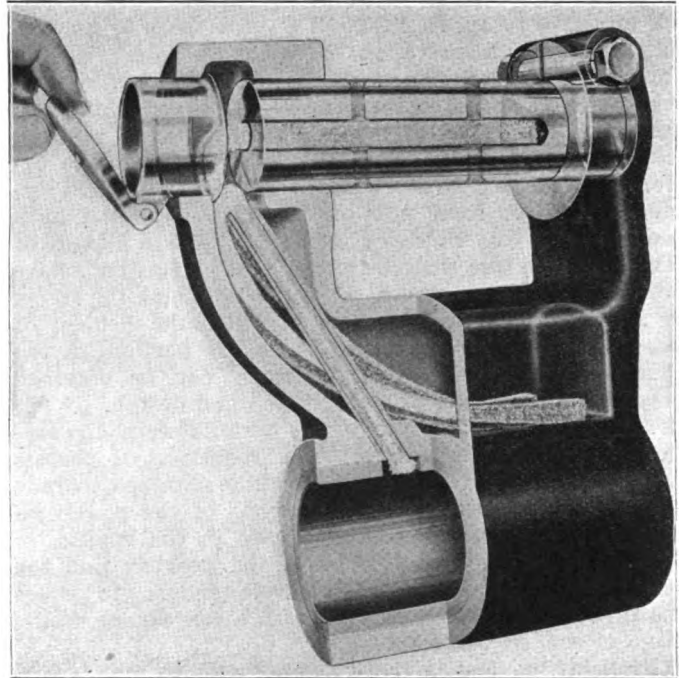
A MAGAZINE LUBRICATOR FOR SPRING-SHACKLES WITH A RAPID FILL OPENING
